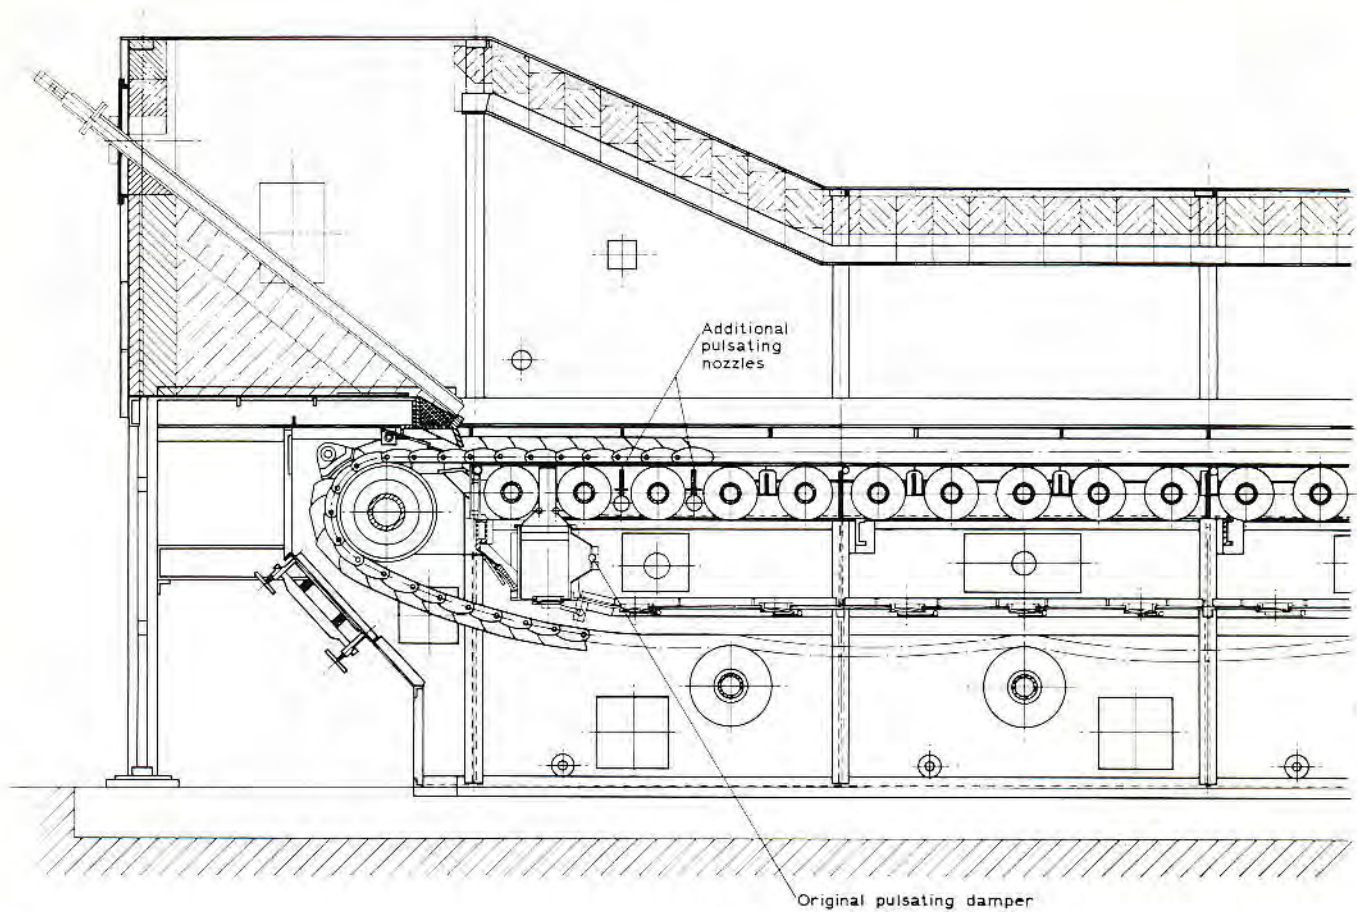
(above and opposite) Elevation, section and plan of cooler showing original and new equipment.
